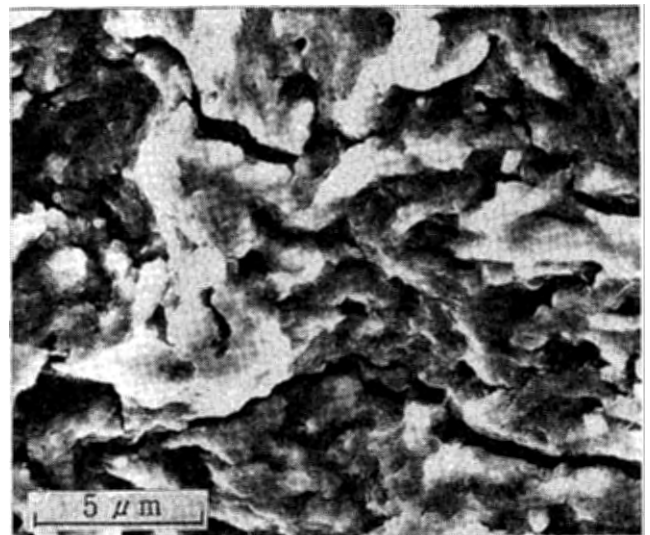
A microfractograph of the fractured surface of cross-section type wire breaking
